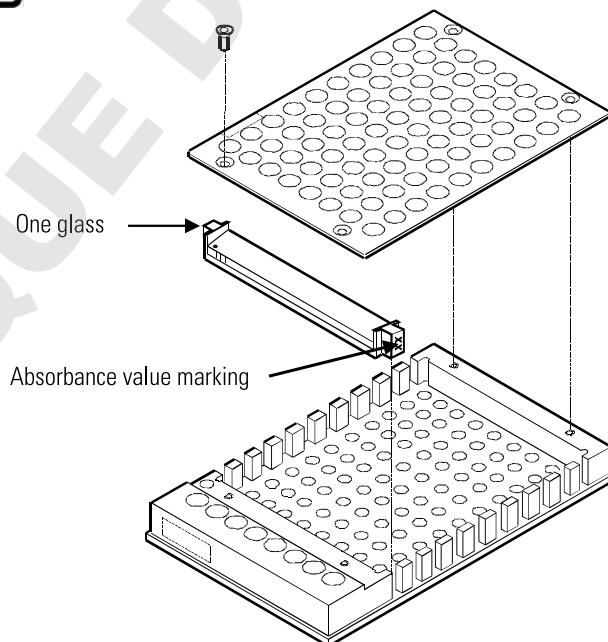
Assembly drawing of the Multiskan Verification Plate
